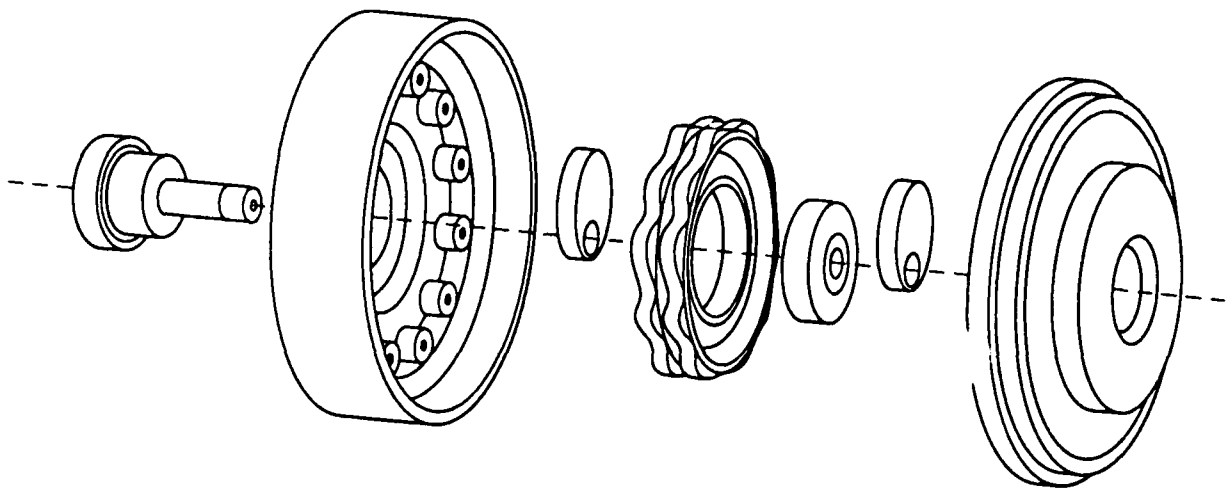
Assembly View of the Cam-type cycloidal reducer from DOJEN. Individual epitrochoid disks are replaced by a single cam-type assembly, which is supported on a centrally located bearing. The cam rides on fixed internal pins.
